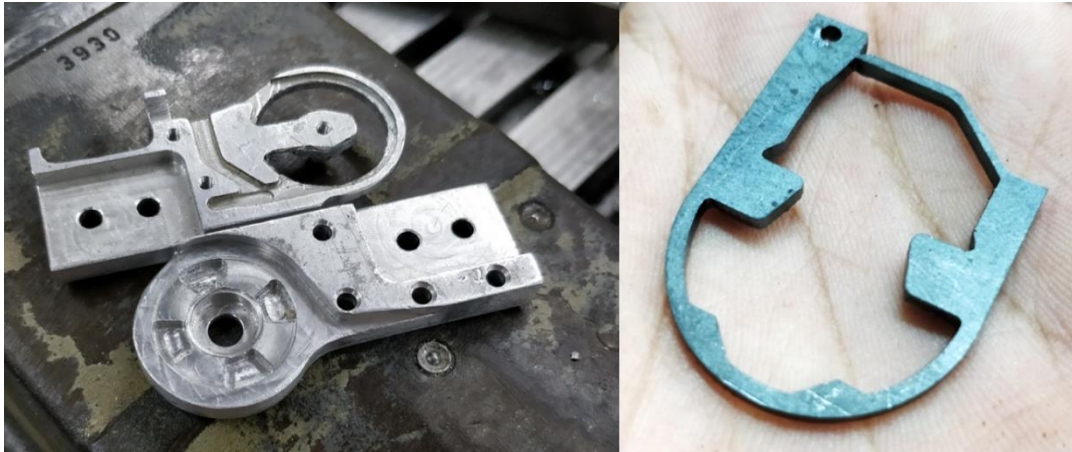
CNC machined components(left) and Laser cut slider (right)
